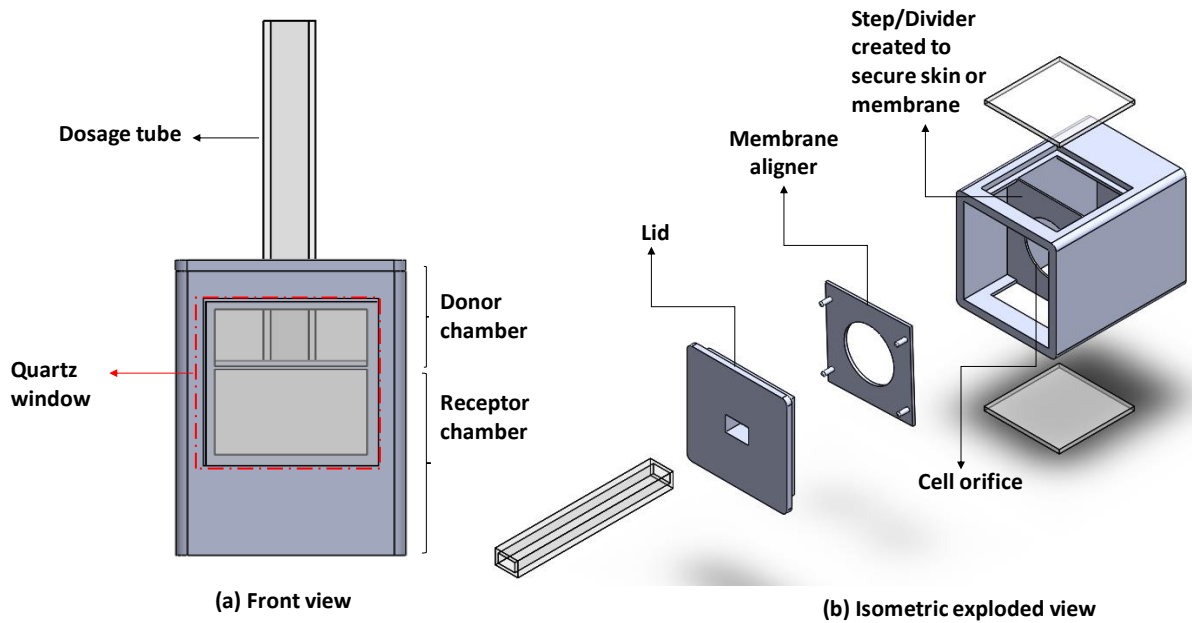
3D CAD model (a) Front view of the 3D printed diffusion cell prototype with dosage tube inserted from the top (b) Isometric exploded view of the prototype.
